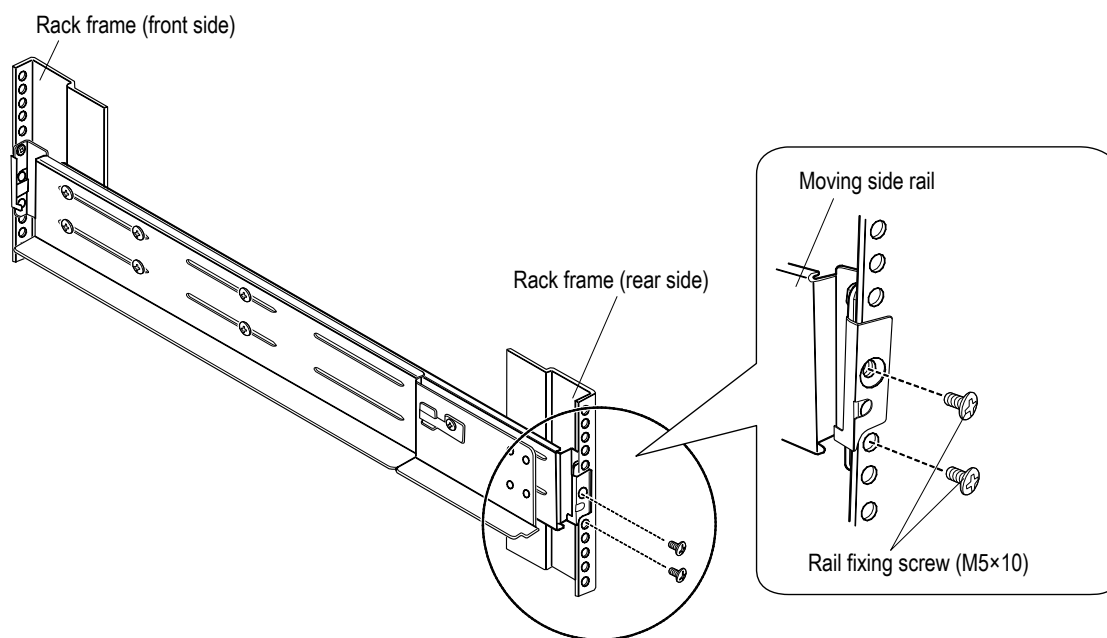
Installing Rack Rails (Circular Hole) for Drive Box (2U)-3
